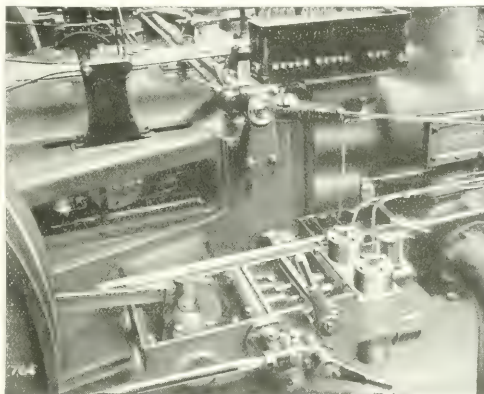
VIEW OF FUEL INJECTION PUMPS, STRAINER TANK AND AIR STARTING GEAR OF "NORDBERG" OIL ENGINE.
